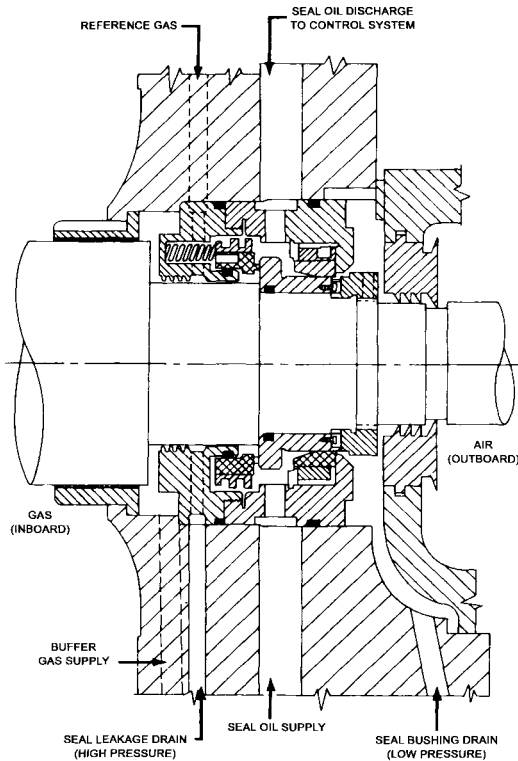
Compressor shaft seal (Courtesy of IMO Industries)
